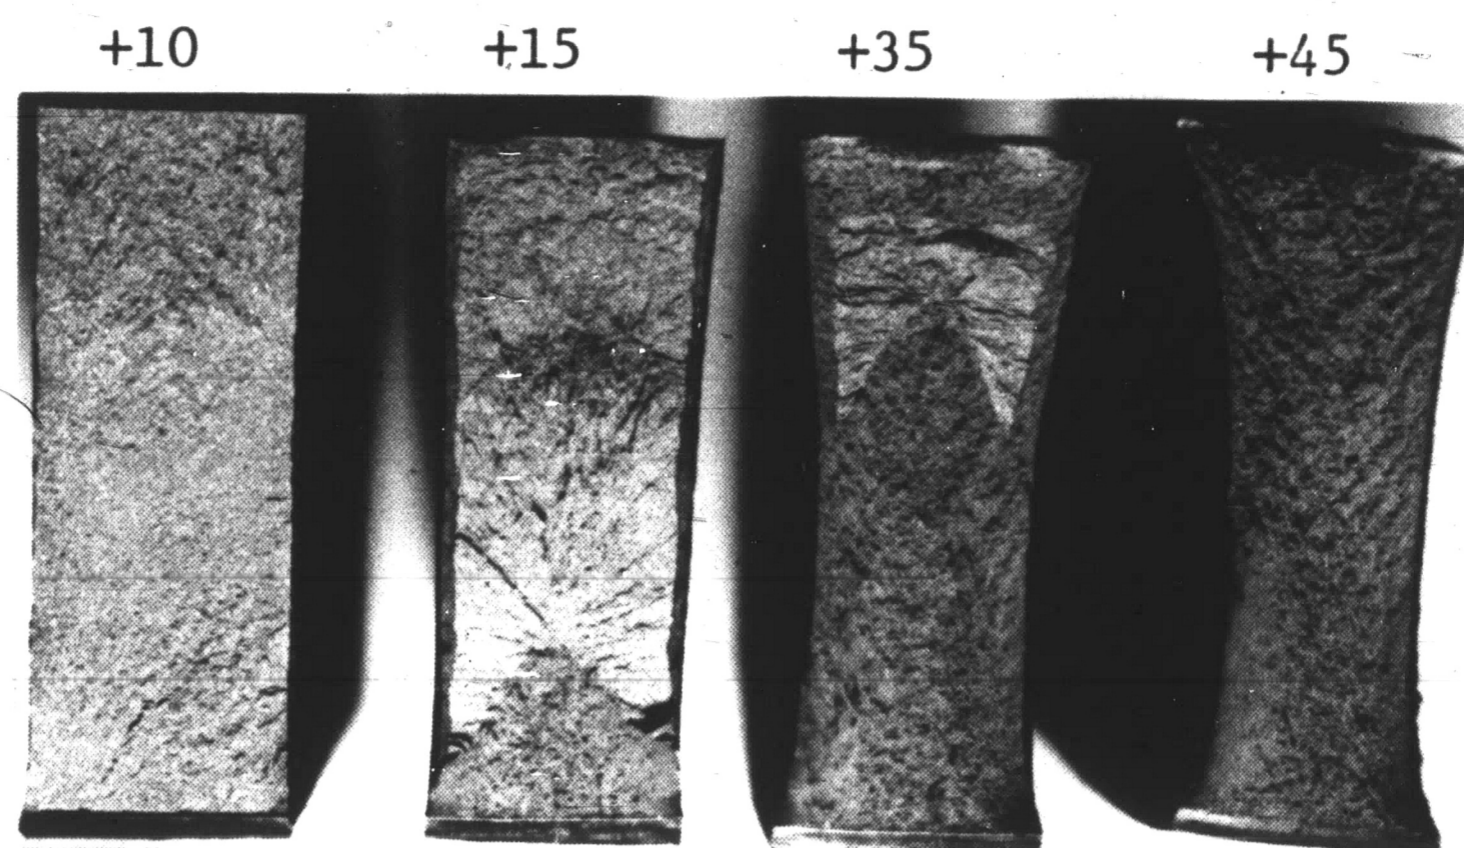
Typical Fracture Surfaces From the Van der Veen Test
